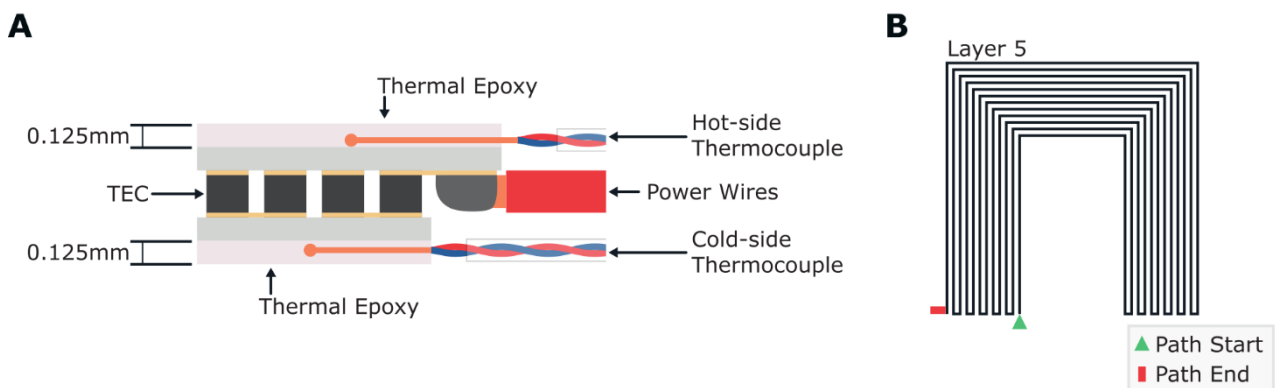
No Heat Sink TEC Assembly and print paths.
